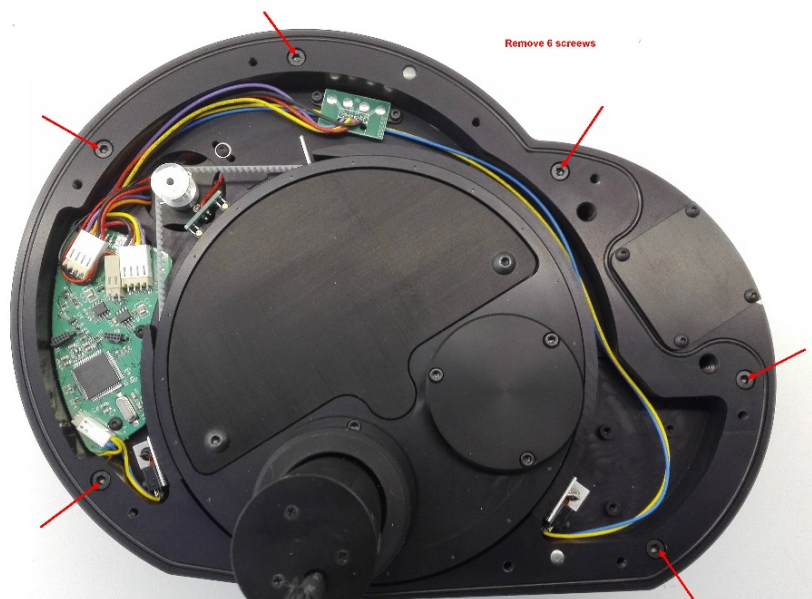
Top layer with detector changer after removal of the outer part of the top layer.
